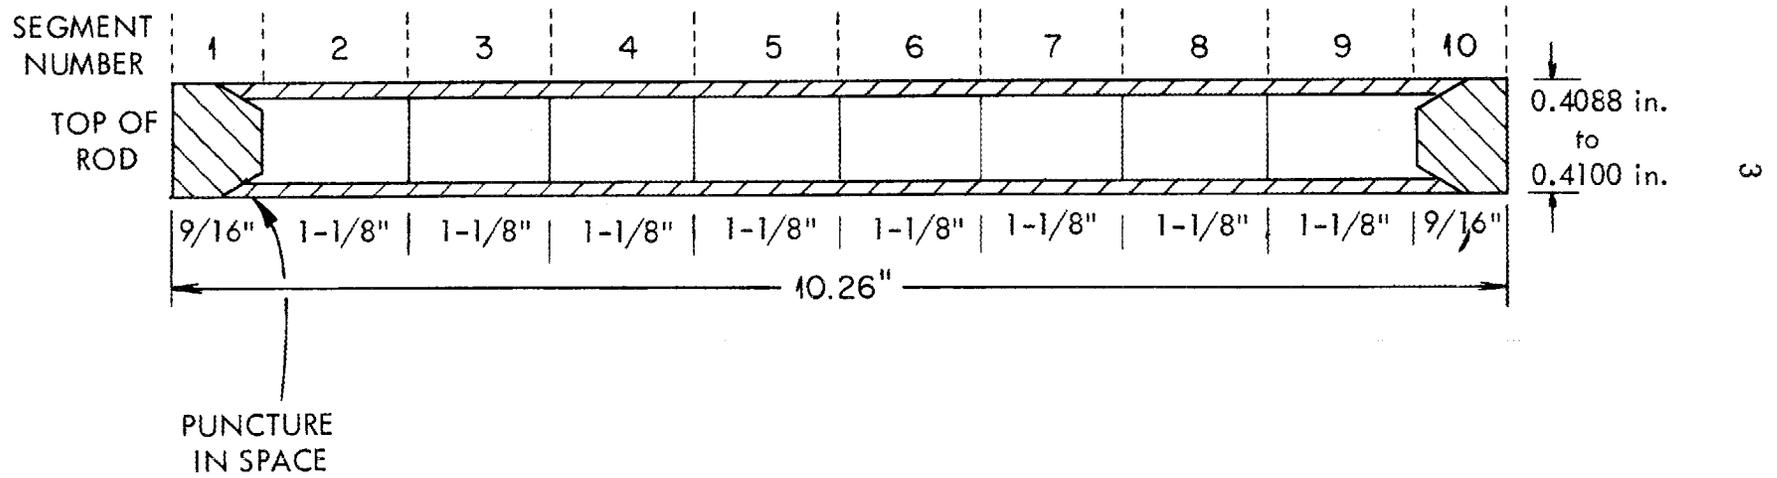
Sectioning Diagram, Rod 10, Bundle 0320, Blanket Assembly K-10, PWR Core 1.
